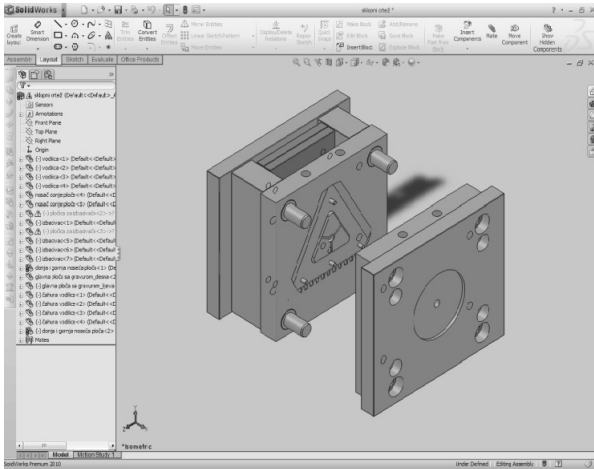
Tools for injection molding of ice scrapers designed software package SolidWorks 2010 [13]
